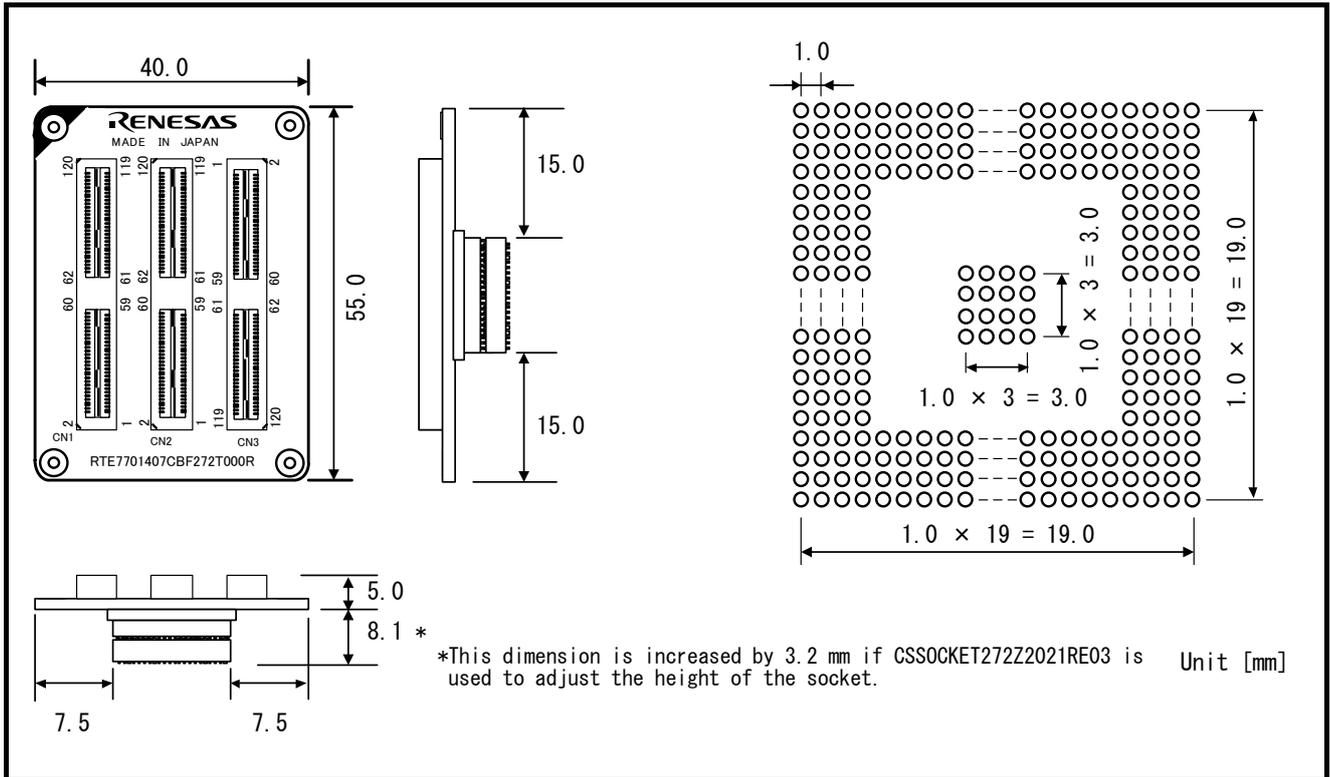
Drawing with Dimensions and a Pad Pattern for Reference
